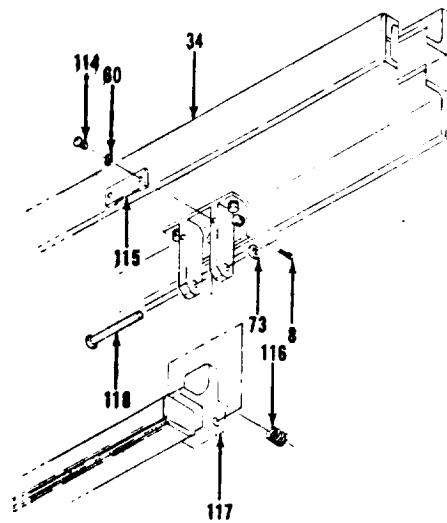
LES Coupler Assembly (Sheet 5 of 9)
